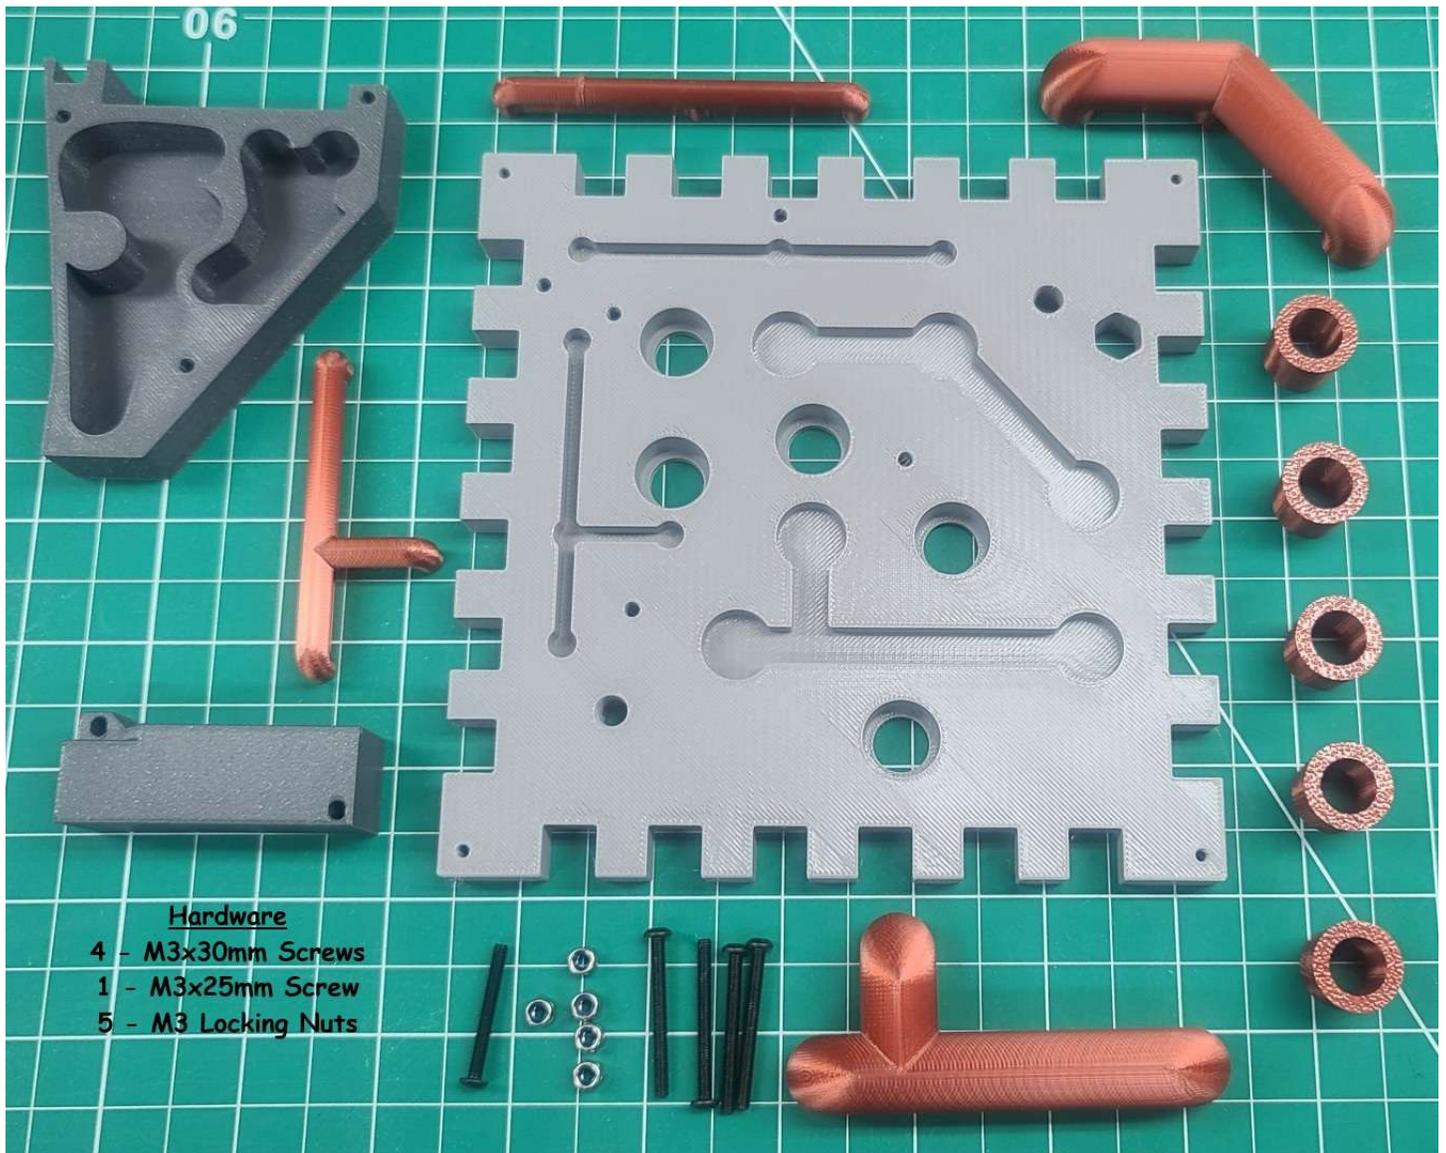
ALT Side 6 Printed Parts and Misc. Hardware
